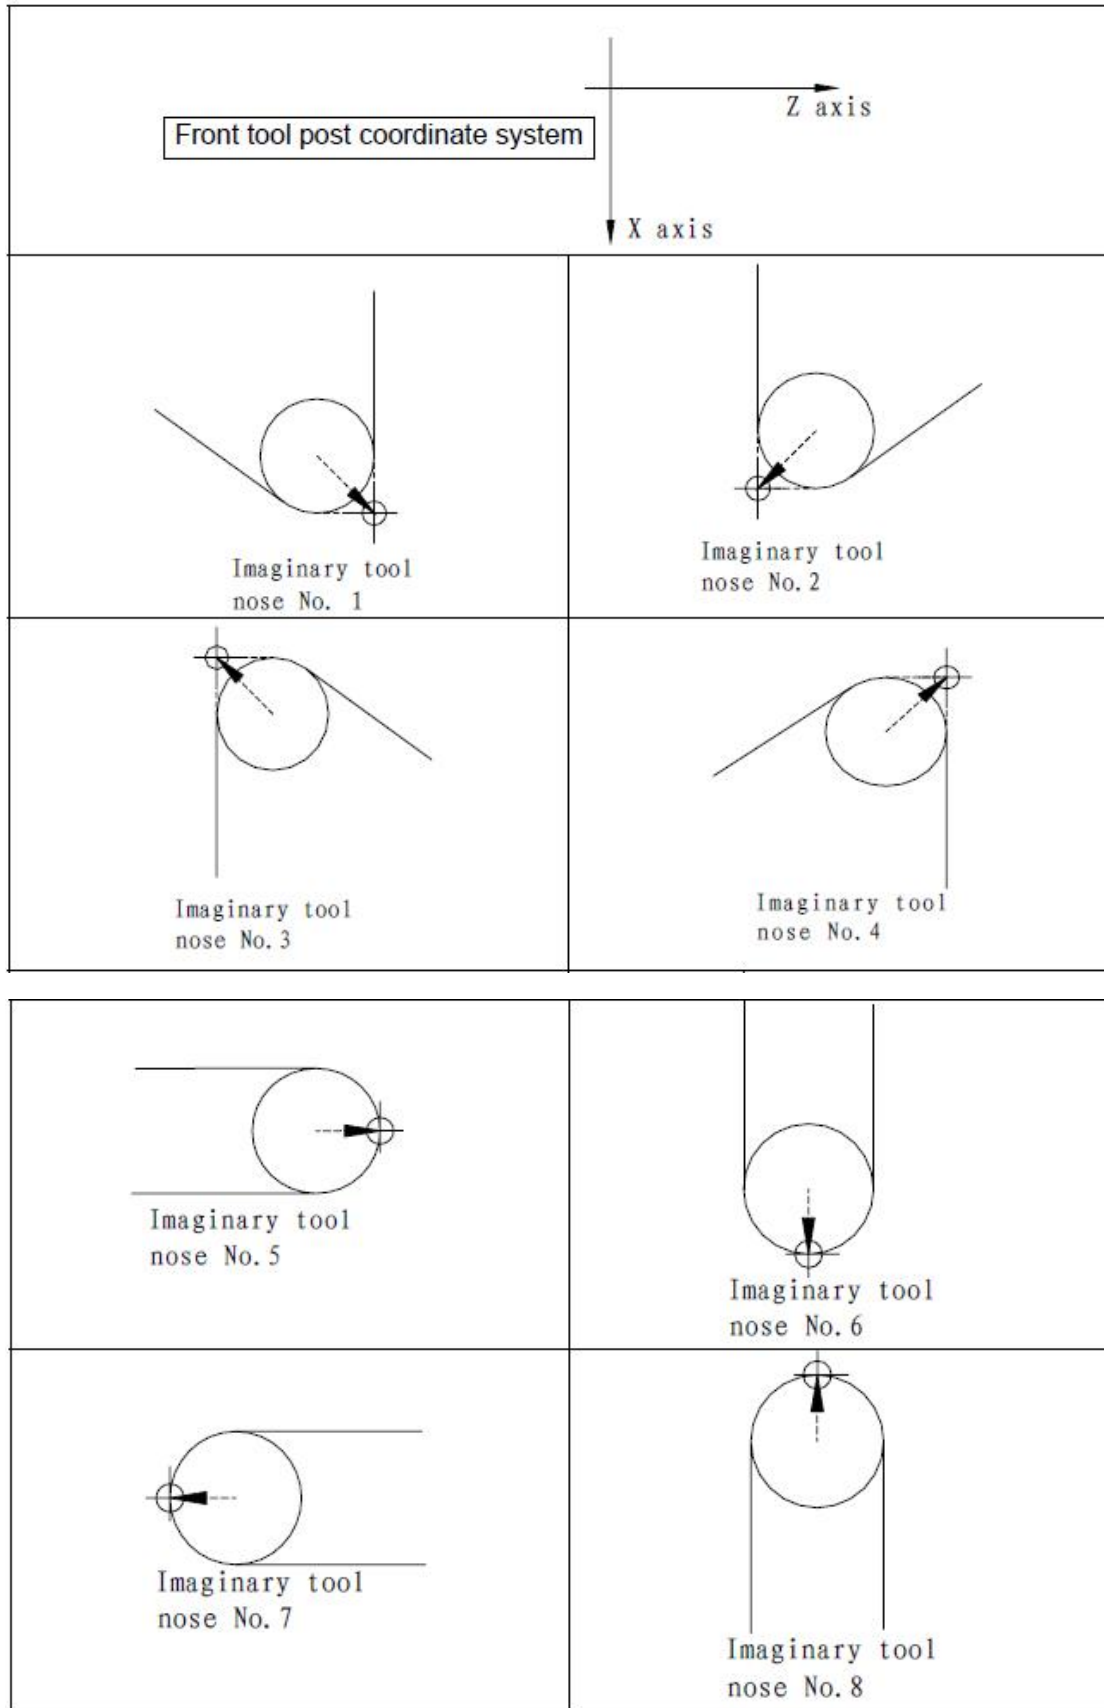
Imaginary tool nose number in front tool post coordinate system
